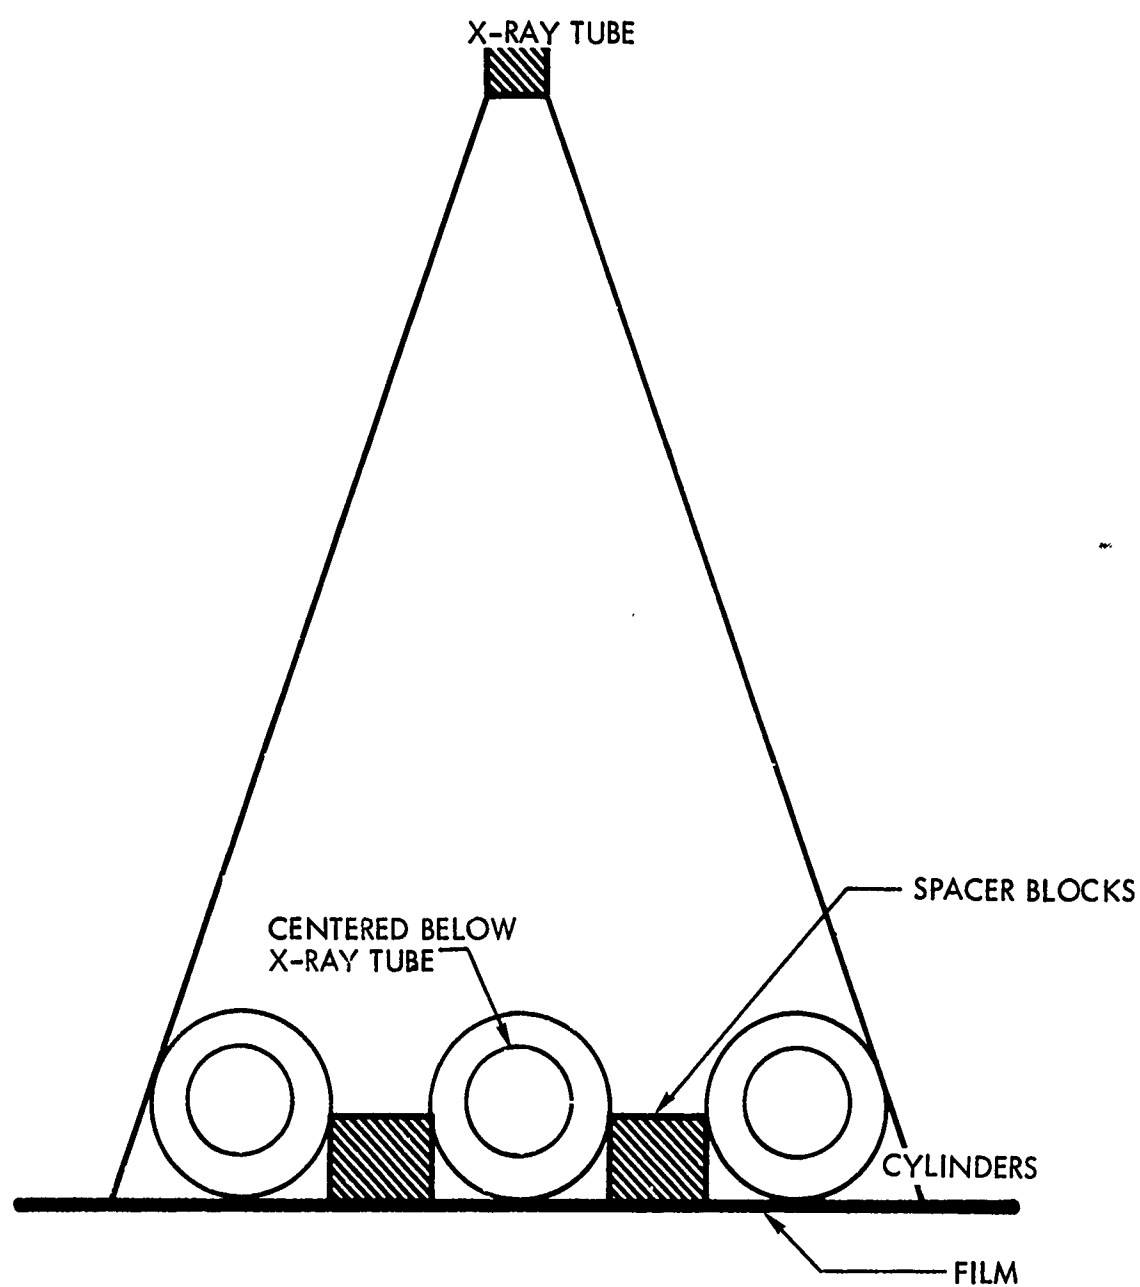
SCHEMATIC SKETCH SHOWING X-RAY METHOD USED TO INSPECT TEST CYLINDERS
